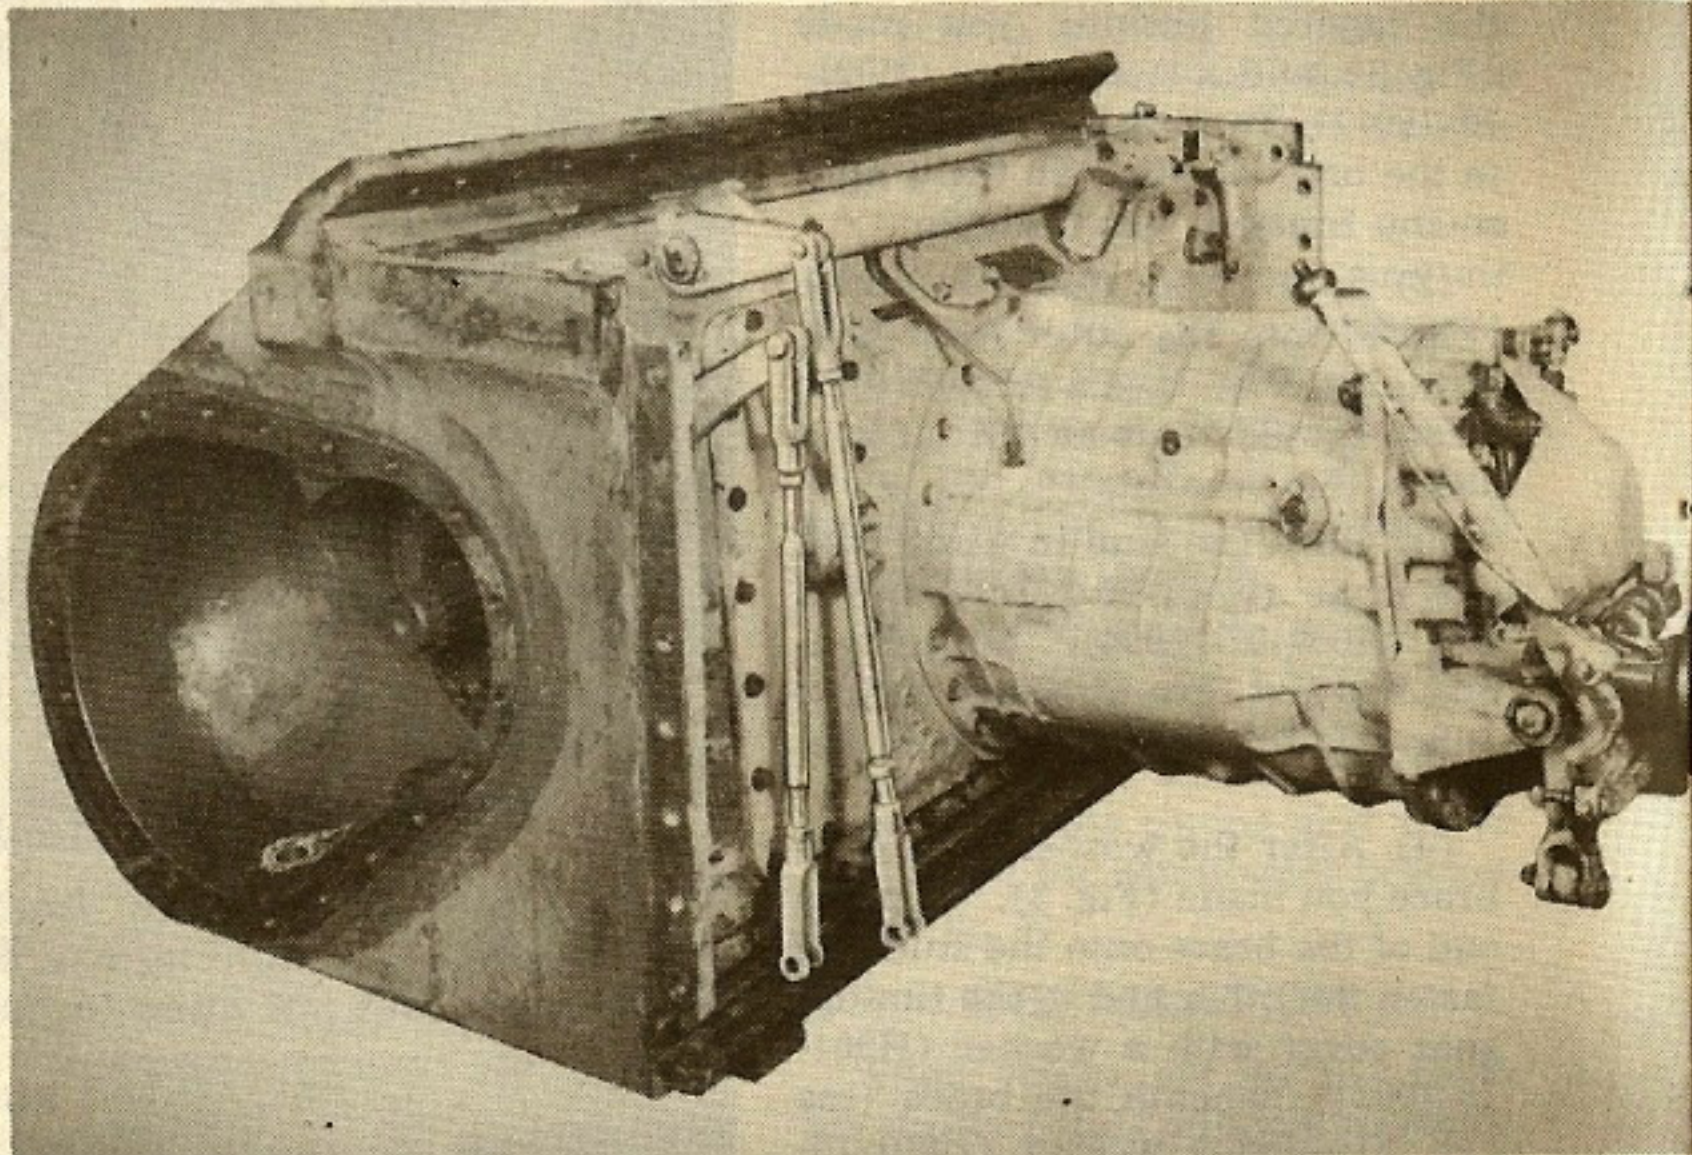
The 1-piece differential housing, double-anchor-brake type, features push-type steering-brake operating-rods.
